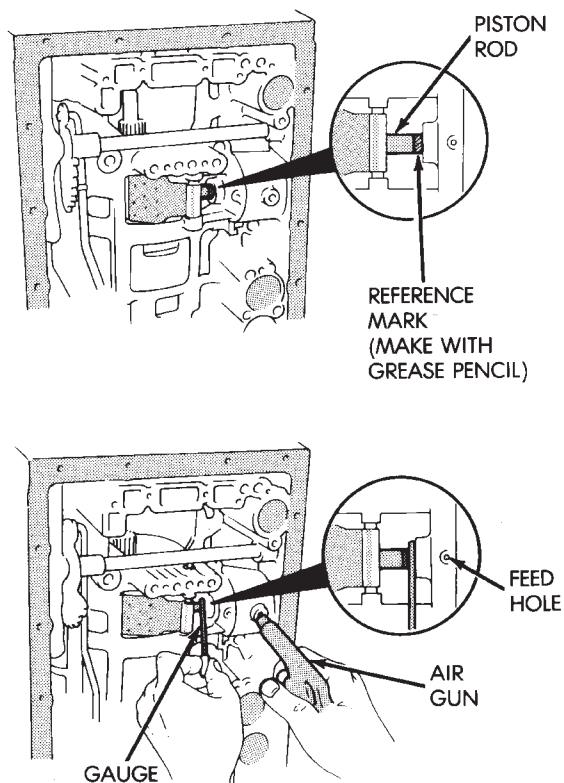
Measuring Second Coast Brake Piston Rod Stroke
